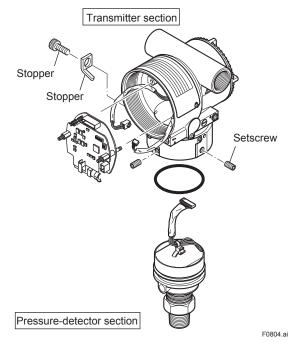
Attaching and Removing the Pressure-Detector Section
